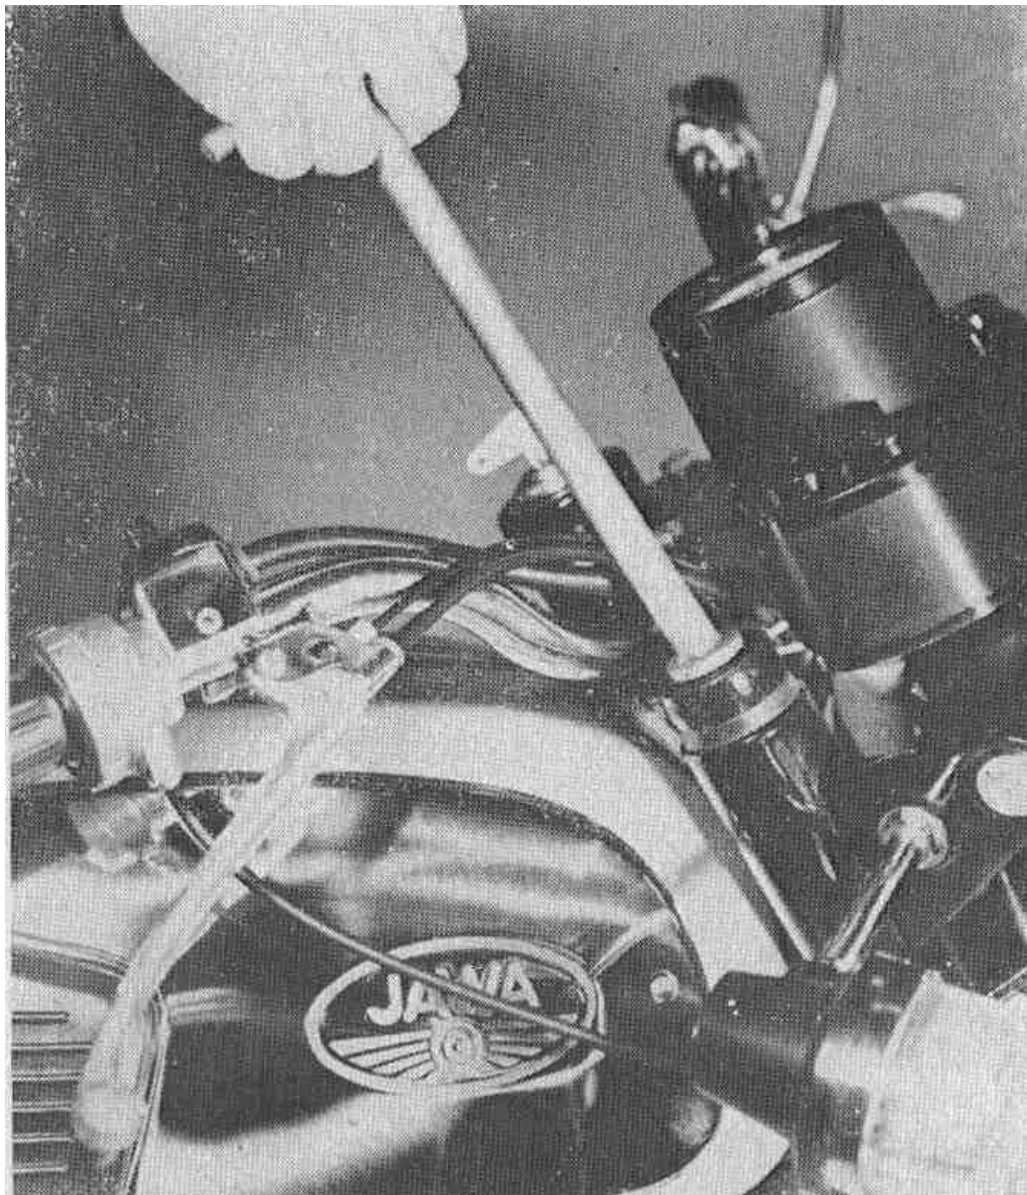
Disassembly of fork leg with aid of a special spanner
